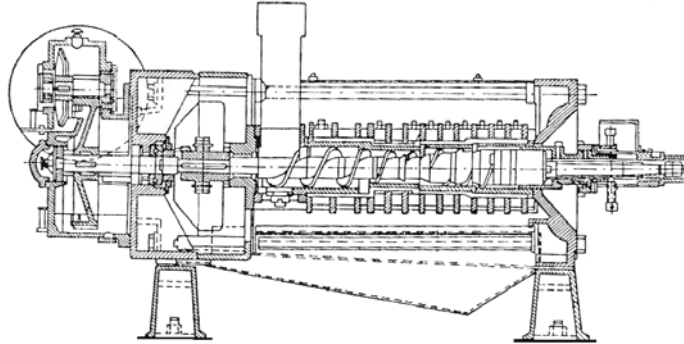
Mechanical Continuous Press Used in Oil Industry
